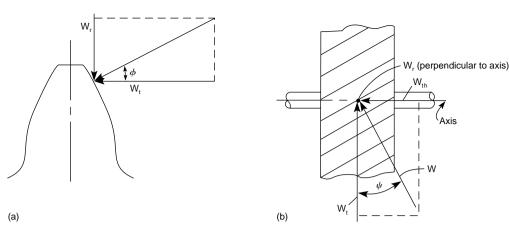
Forces on spur and helical teeth. (a) Spur gear; (b) helical gear.
